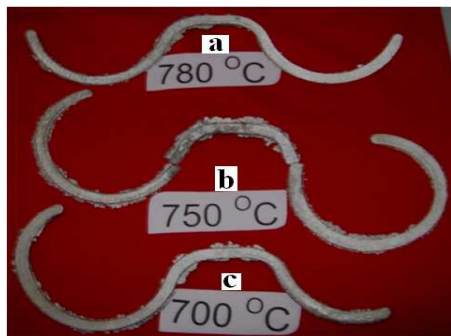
Spiral test casting of A713 alloy without scrap addition, poured at a) 780 °C, b) 750 °C c) 700 °C (Left side coated and right side un-coated)
